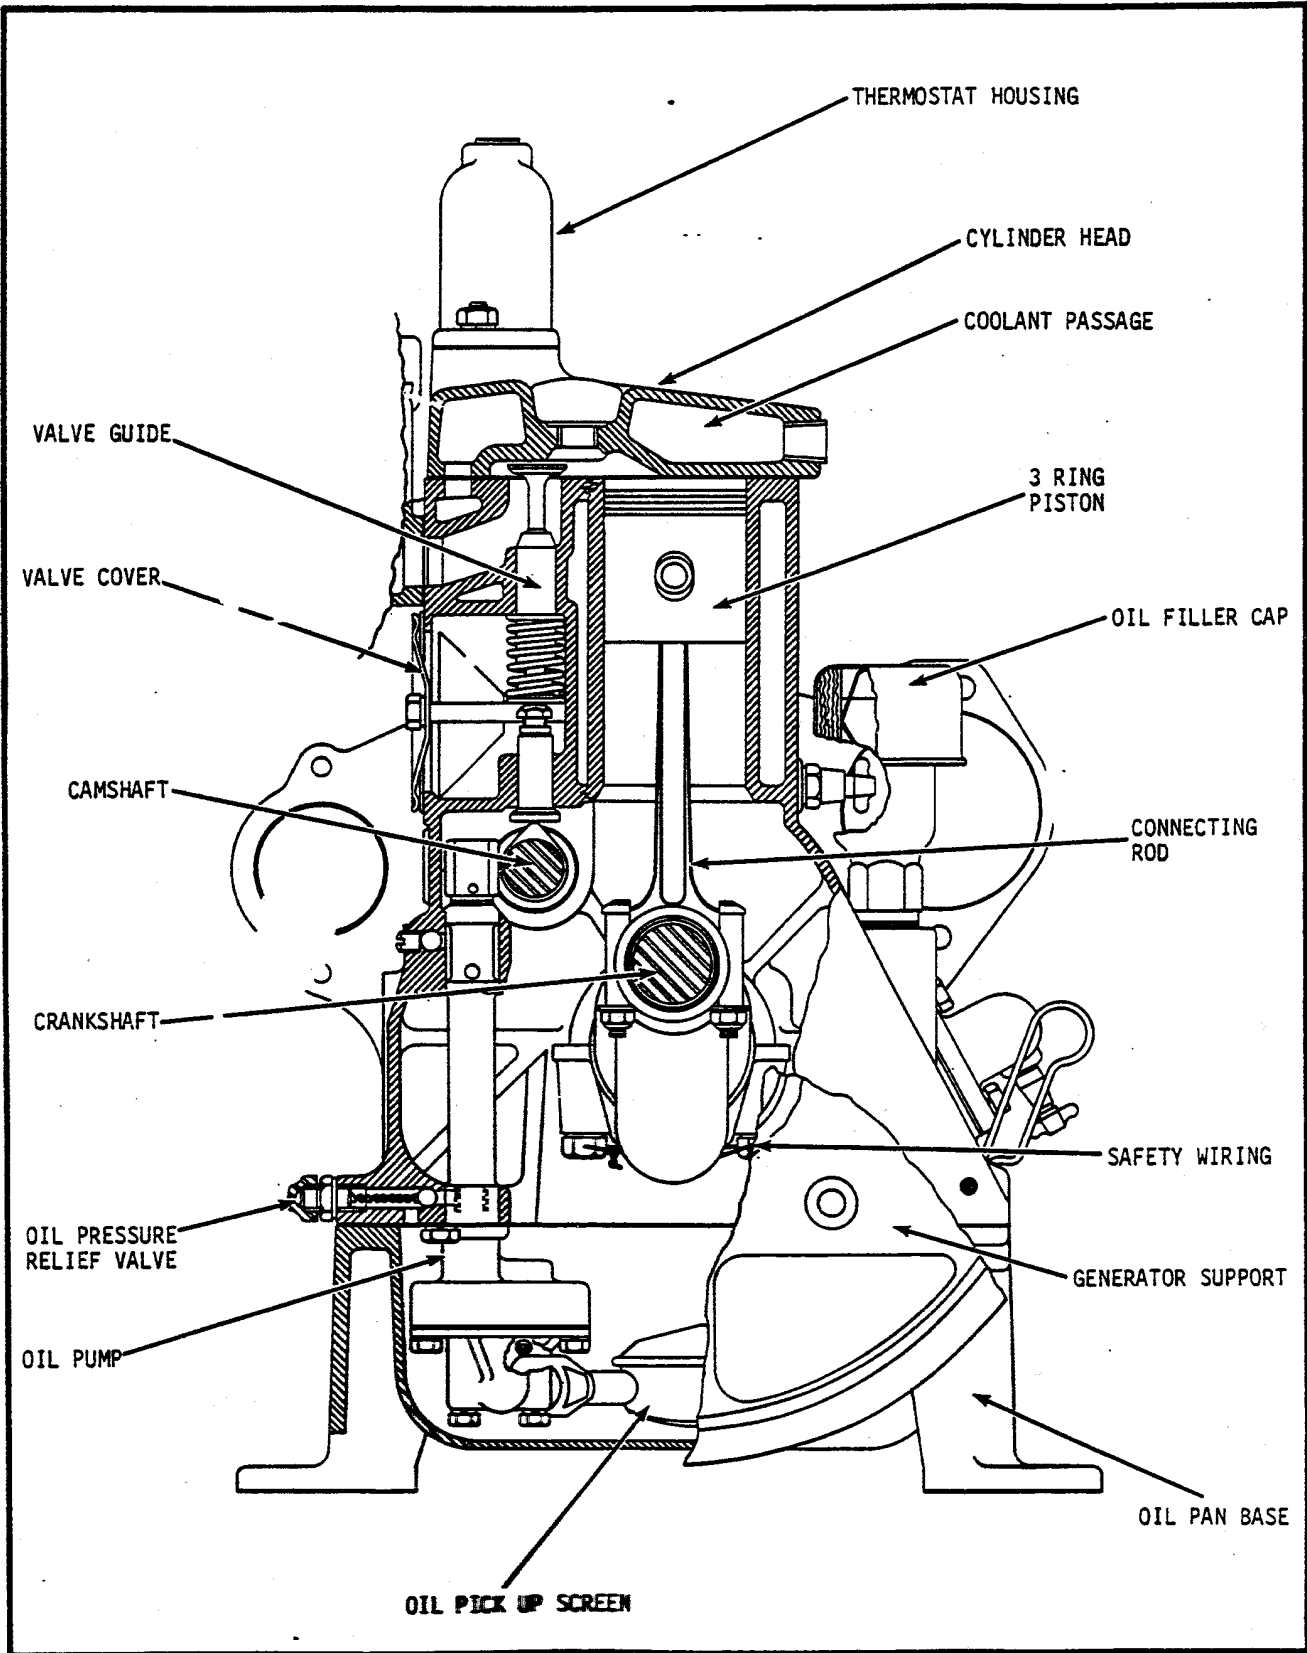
CROSS SECTIONAL VIEW OF ENGINE FROM GENERATOR END
